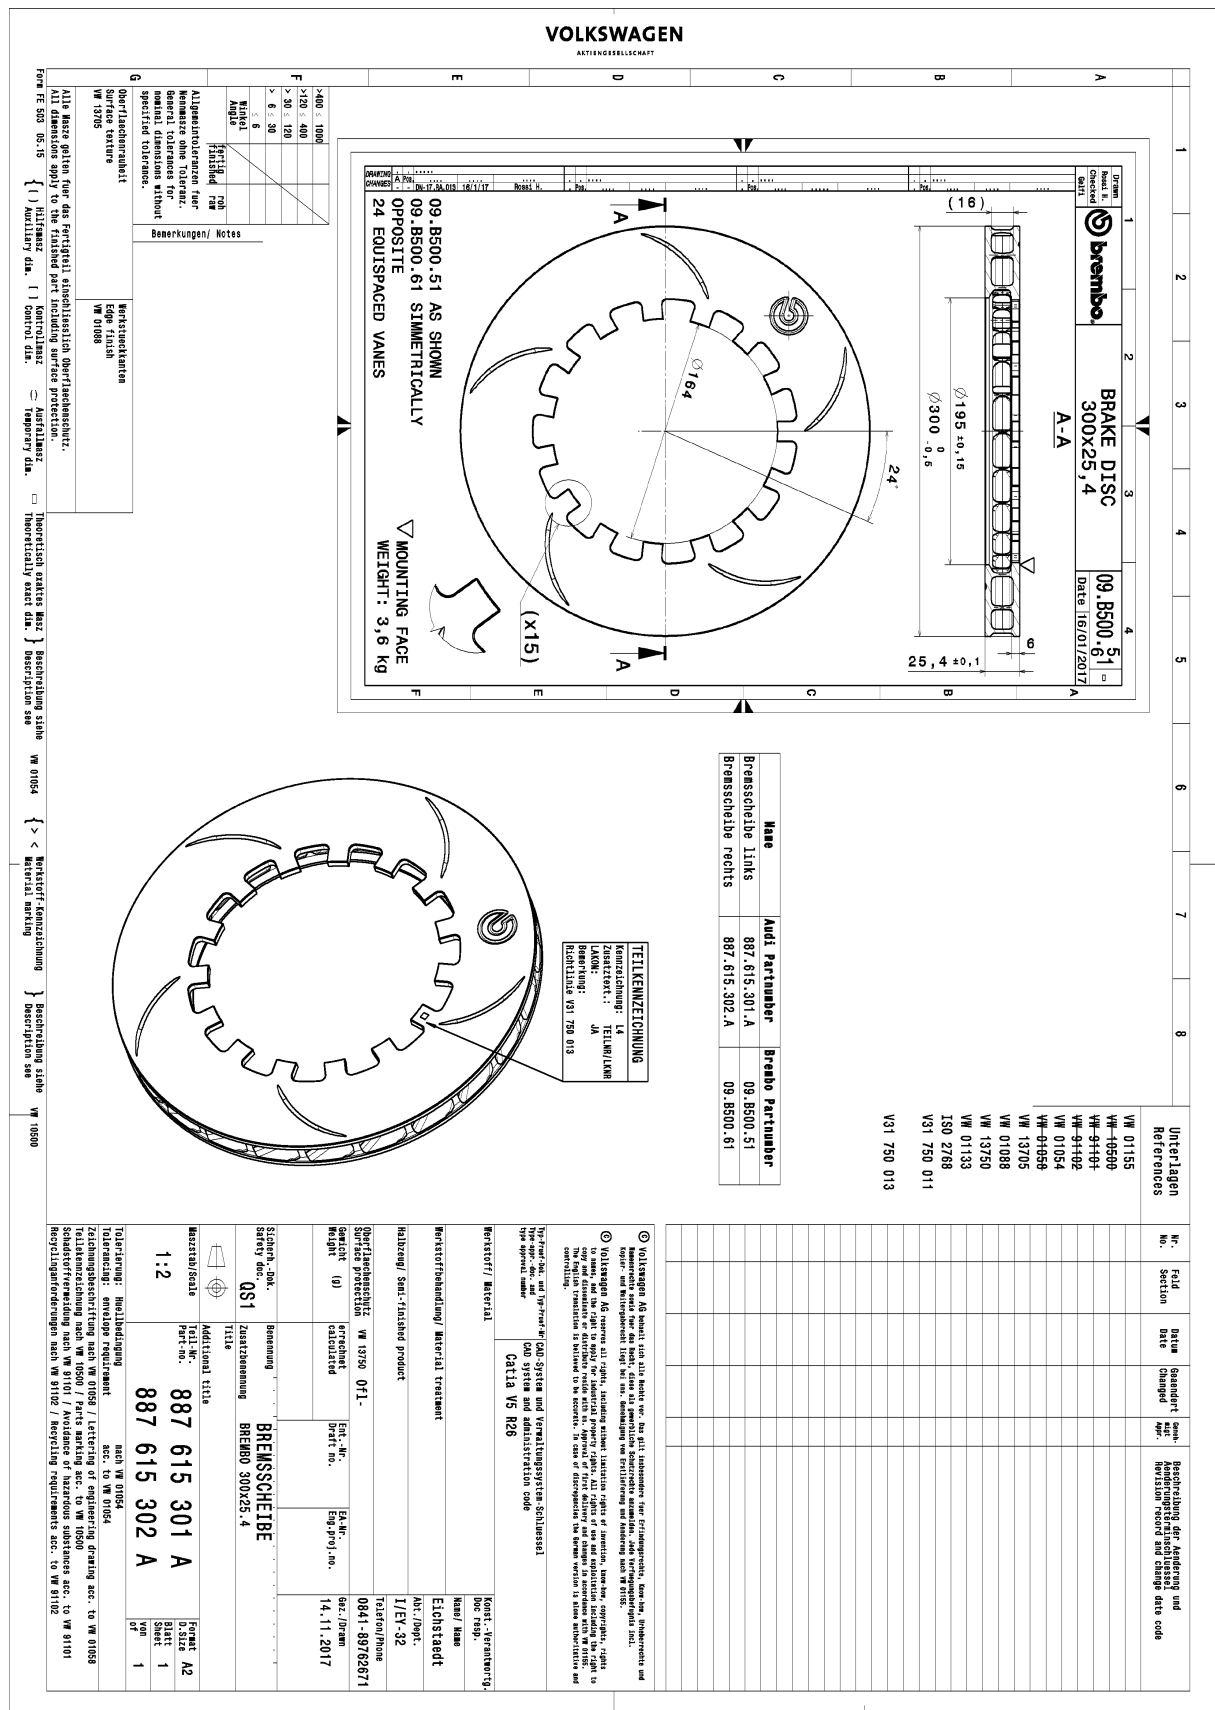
Drawing Brake Disk from Brembo® (Ljungberg, 2018)
